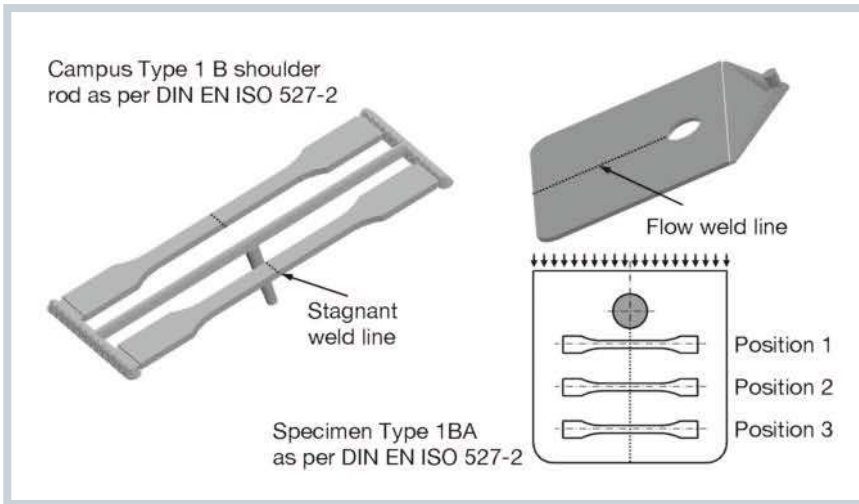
The mechanical behavior of weld lines was determined on specimens of different geometry
